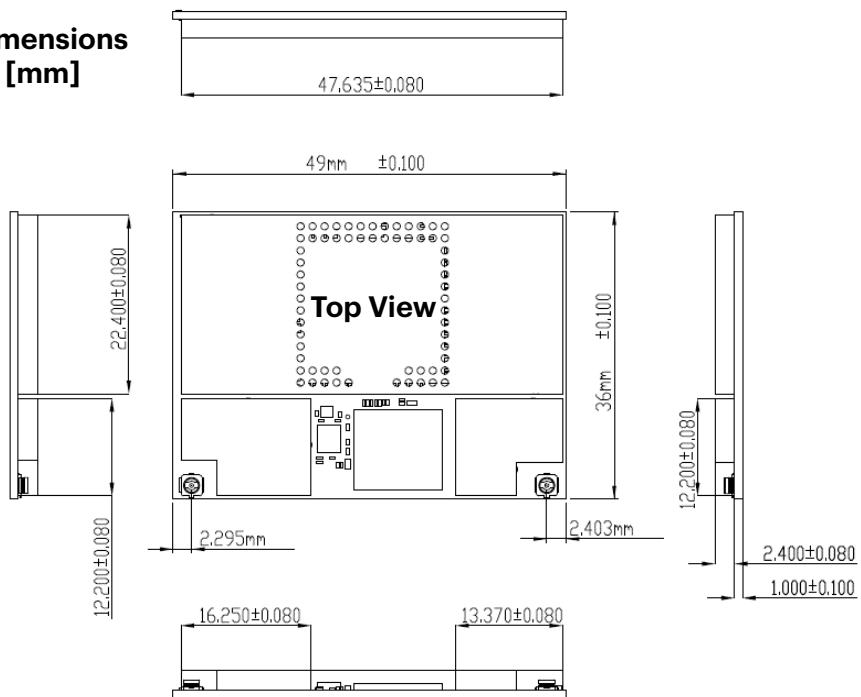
ARTIK 530/530s Module Mechanical Dimensions Top View
